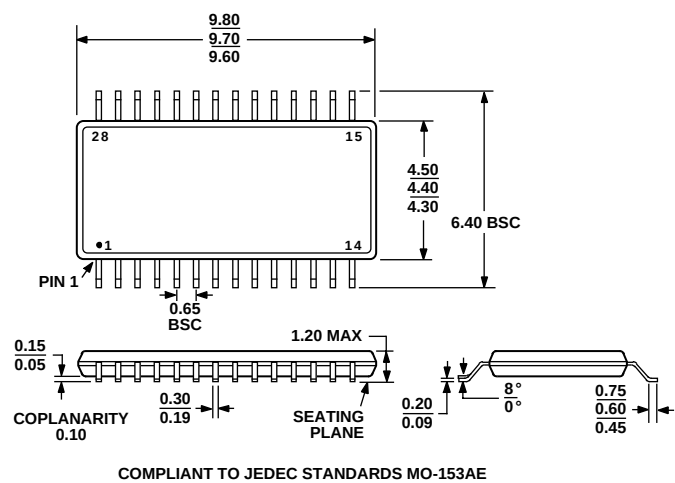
28-Lead Thin Shrink Small Outline Package [TSSOP]
